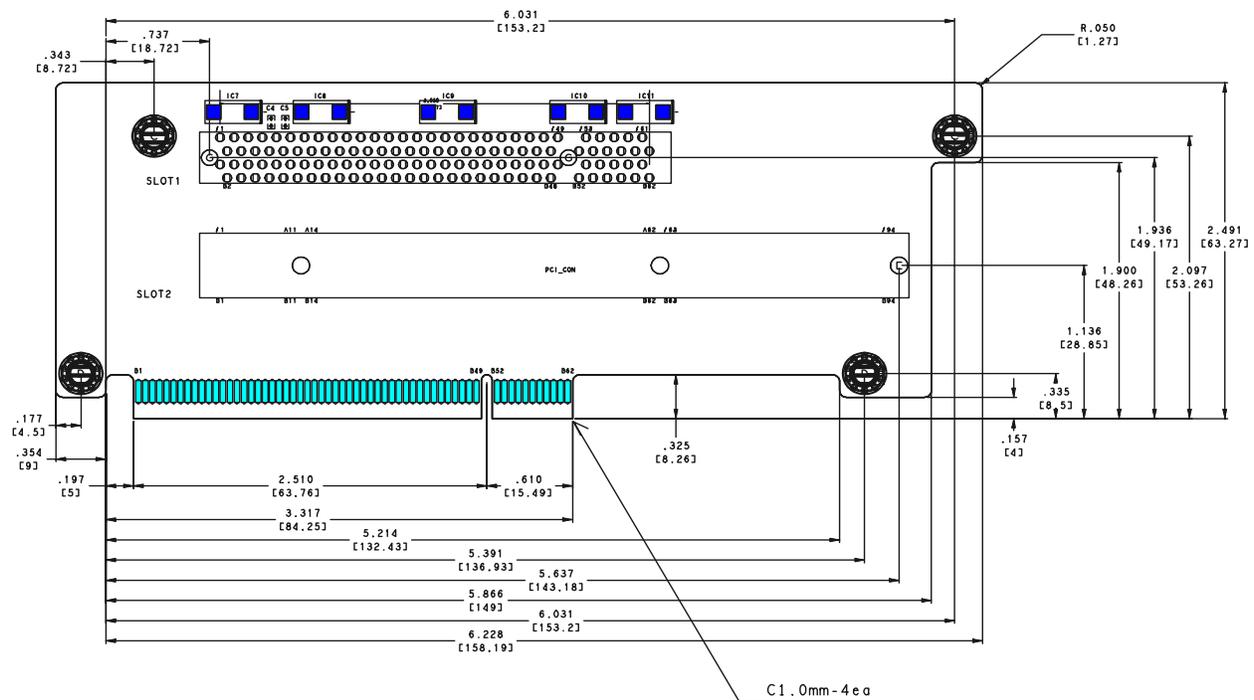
Component and Connector Placement of Rigid Printed Circuit
